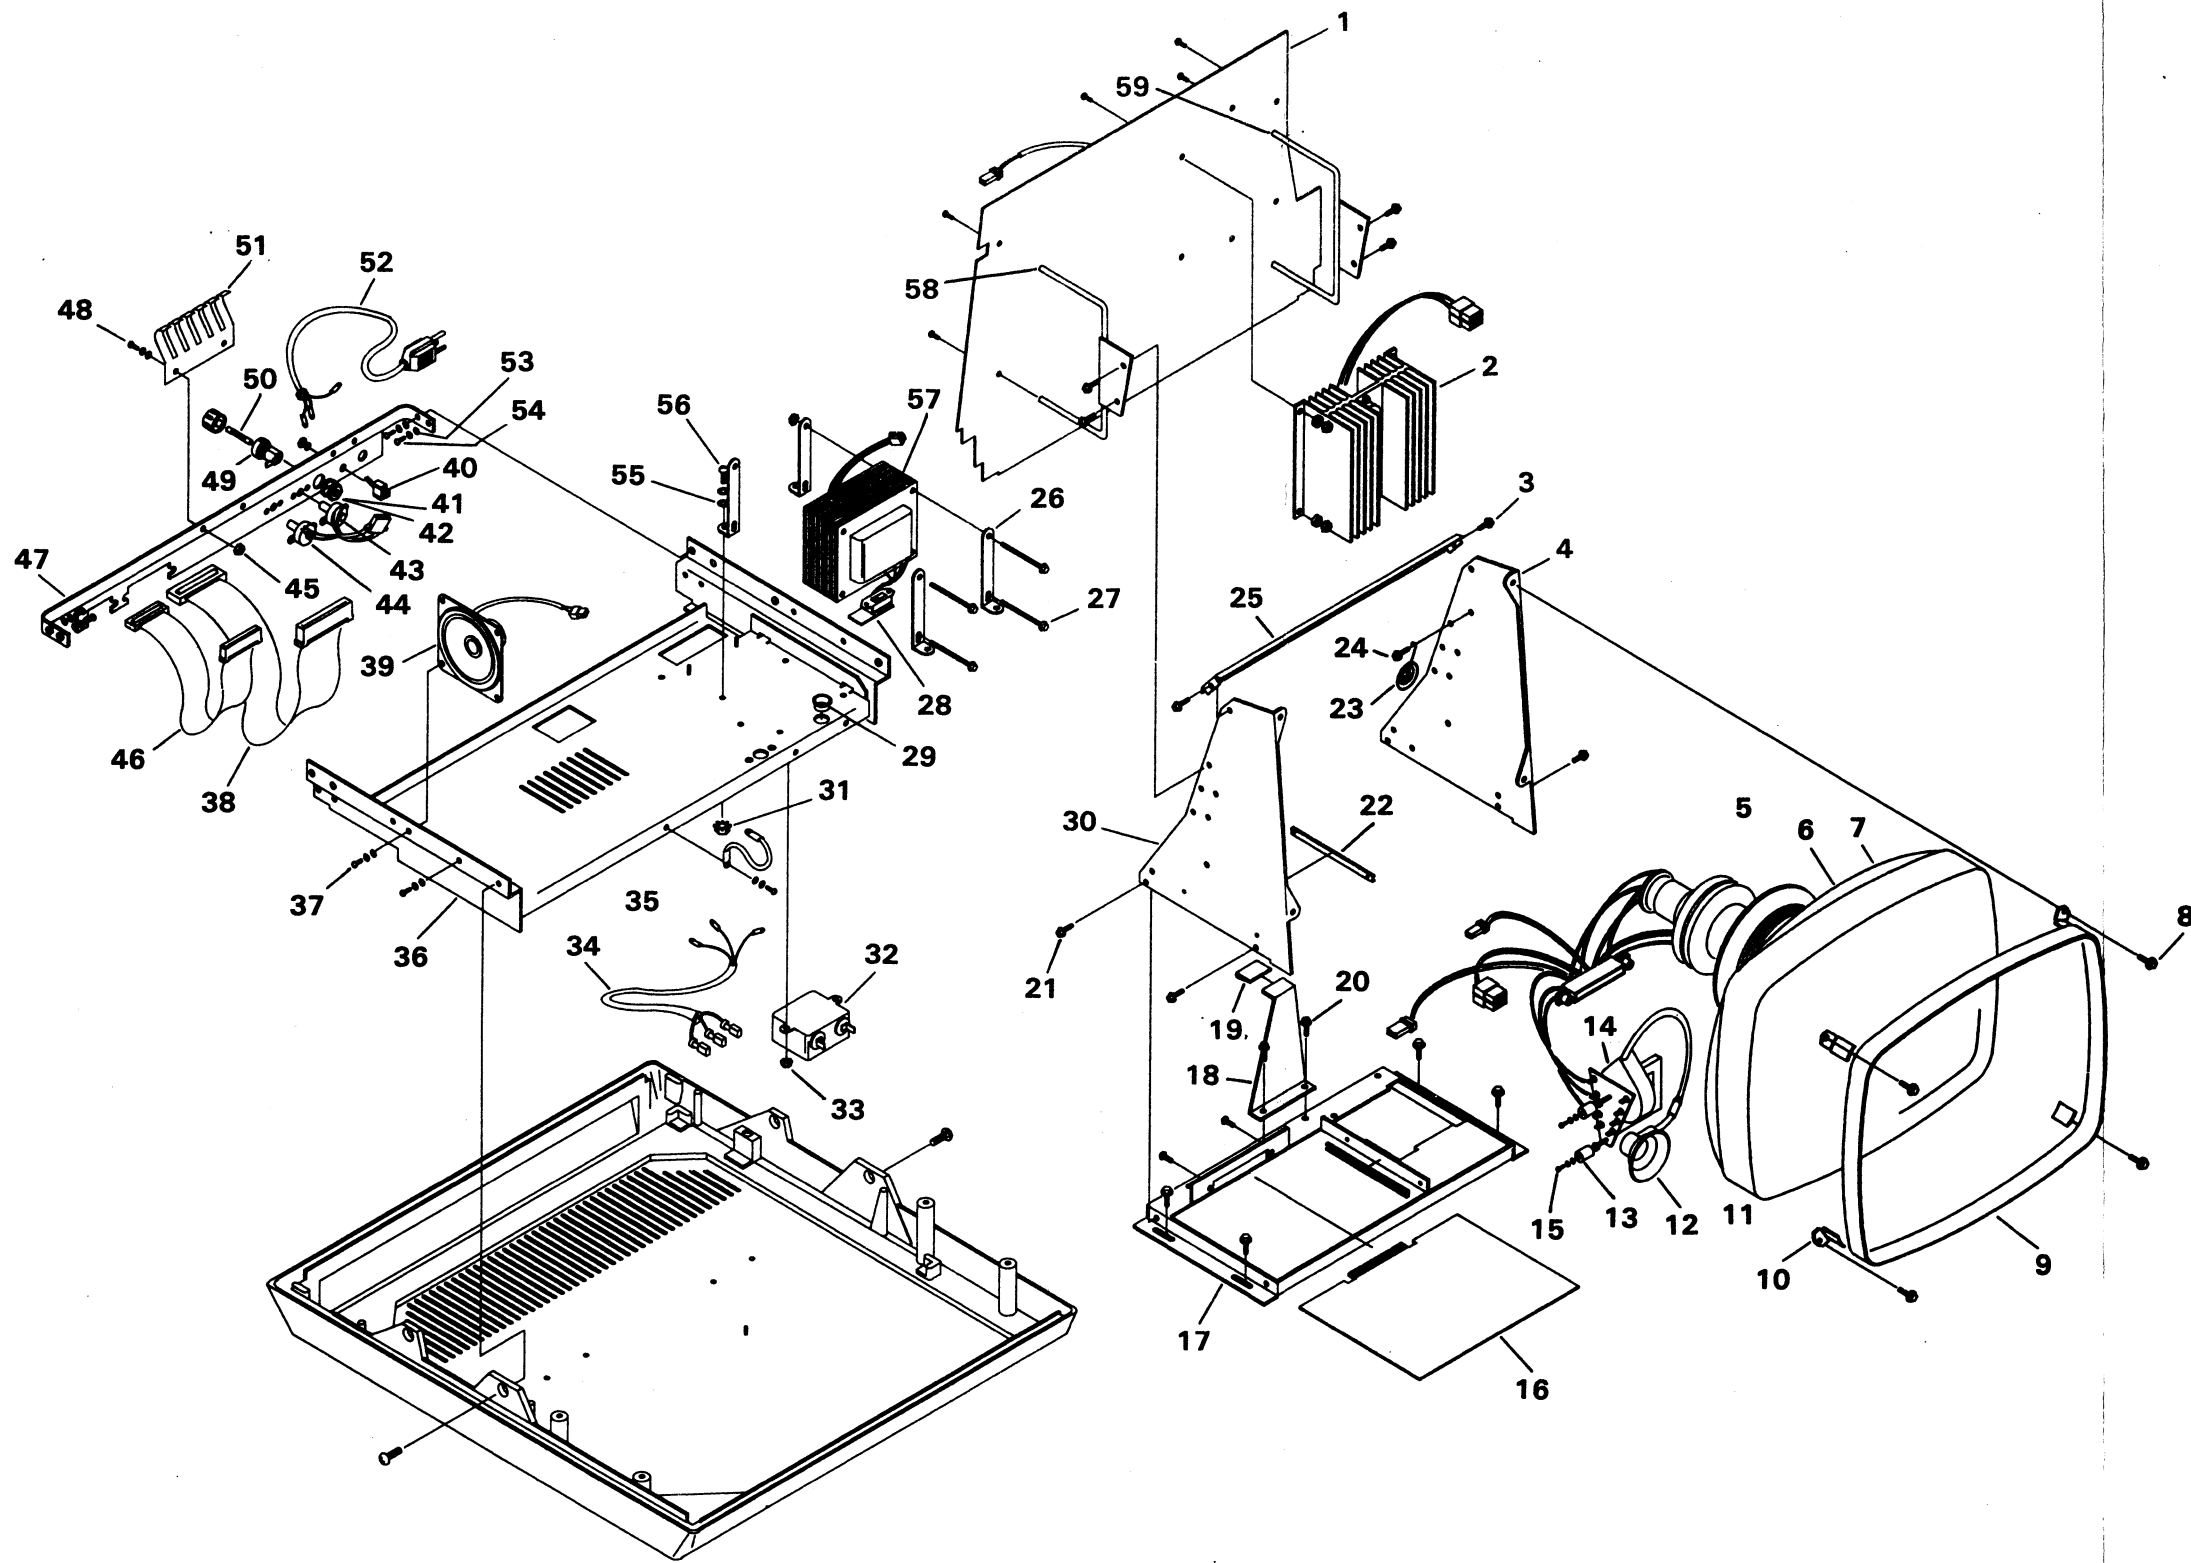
12" MONITOR & 2236DE WK/ST CHASSIS ASSEMBLY
